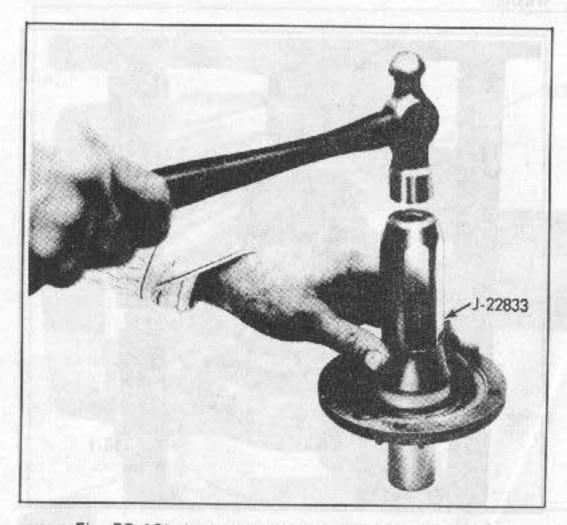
B-13L-Installing Bearing Retainer Oil Seal
